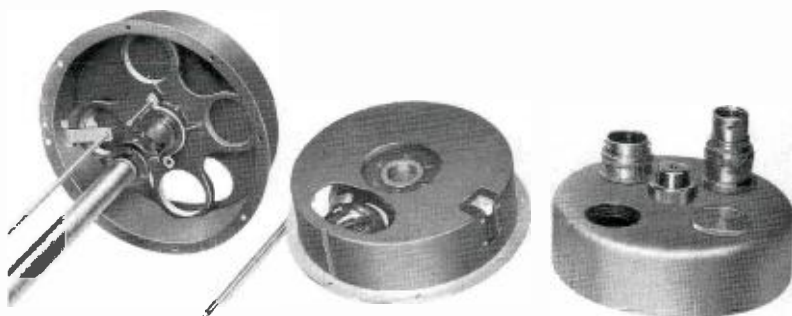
Details of the lens turret assembly showing the rotating turret drum, the stationary turret drum and the lens turret assemblies.
